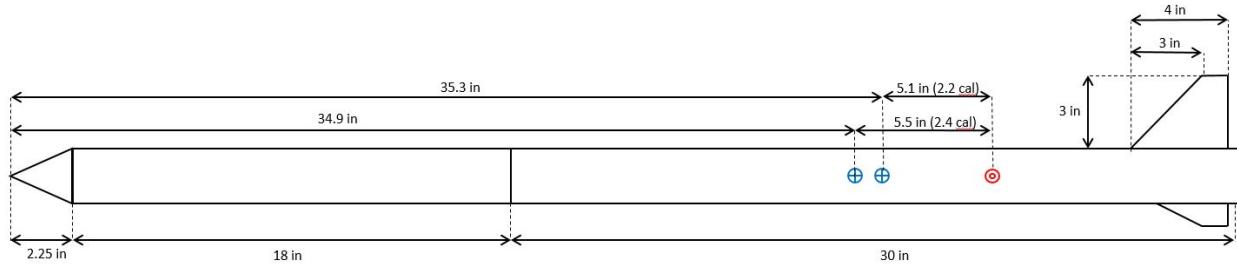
Dimensioned drawing of the rocket, showing CP and CG on both motors
